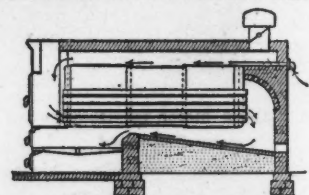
The Schlicht Device Applied to a Steam Boiler.
